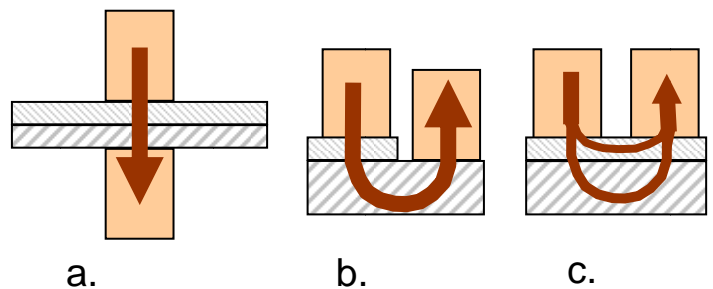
Examples of resistance welding electrode configurations: a. direct, b. step, c. series.
